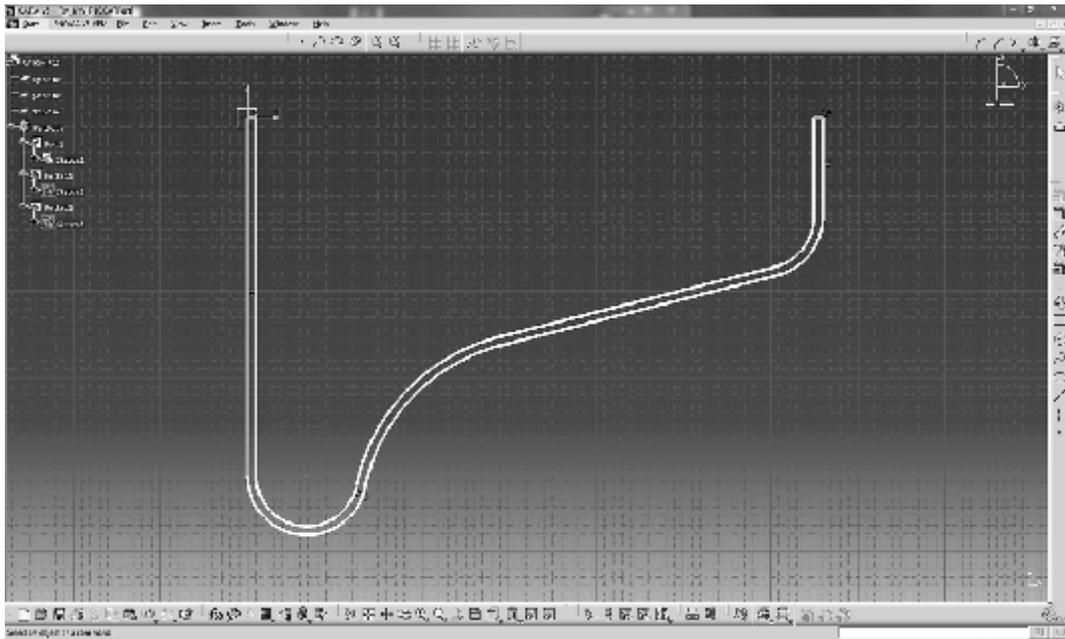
View of a sheet in CATIA V5 sketcher workbench
